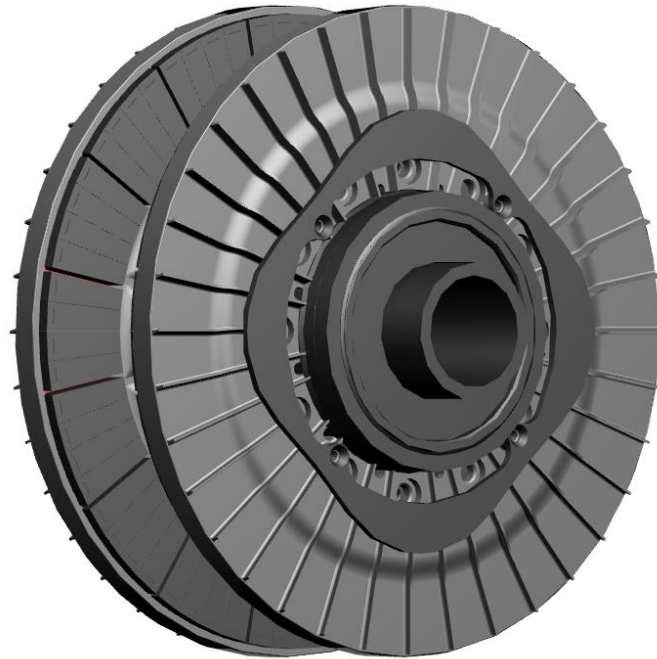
R3 rotor design, open channeled rotor with radial blades.
